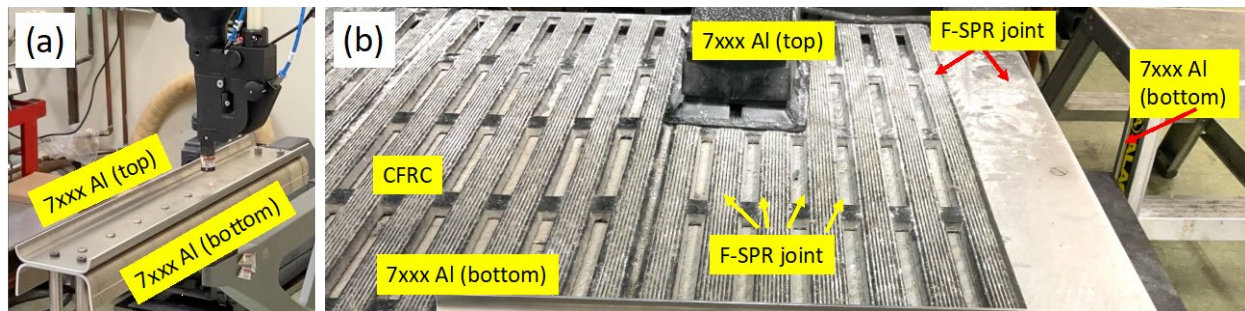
(a) Overview of scale-up 7xxx Al – 7xxx Al part joining using the newly integrated welding system, (b) demonstration of Al-Al and CFRC-Al part joining with multiple joints. Source: ORNL.
